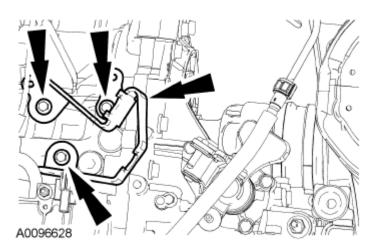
Locating Shift Cables Courtesy of FORD MOTOR CO.
